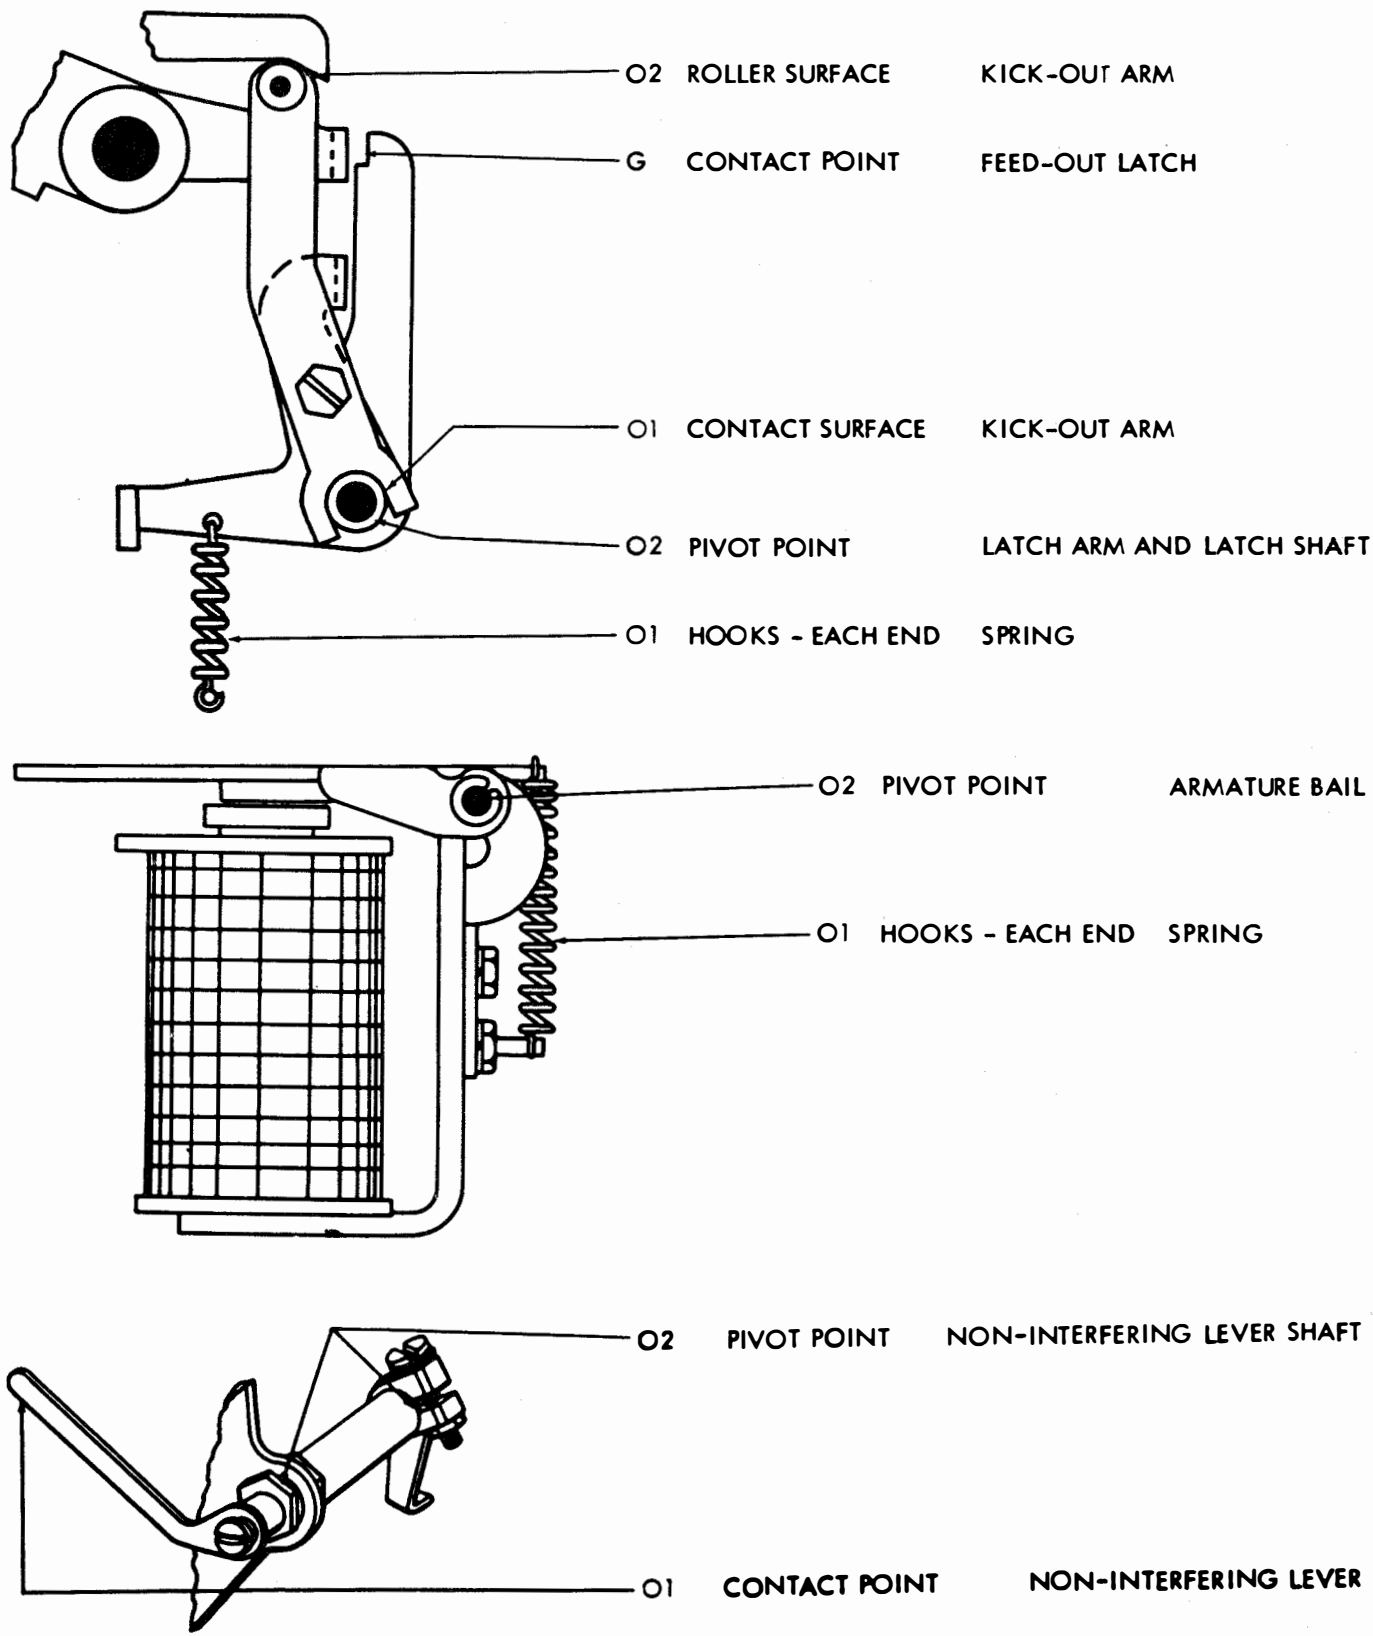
Kick-Out Arm, Armature Bail, and Lever Shaft on Remote Control Non-Interfering BLANK Tape Feed-Out Mechanism, Early Design
